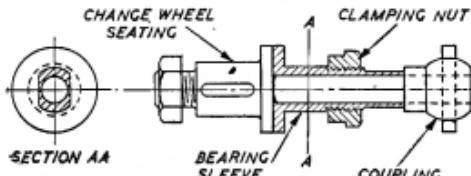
Change wheel spindle for driving worm wheel generating gear.
